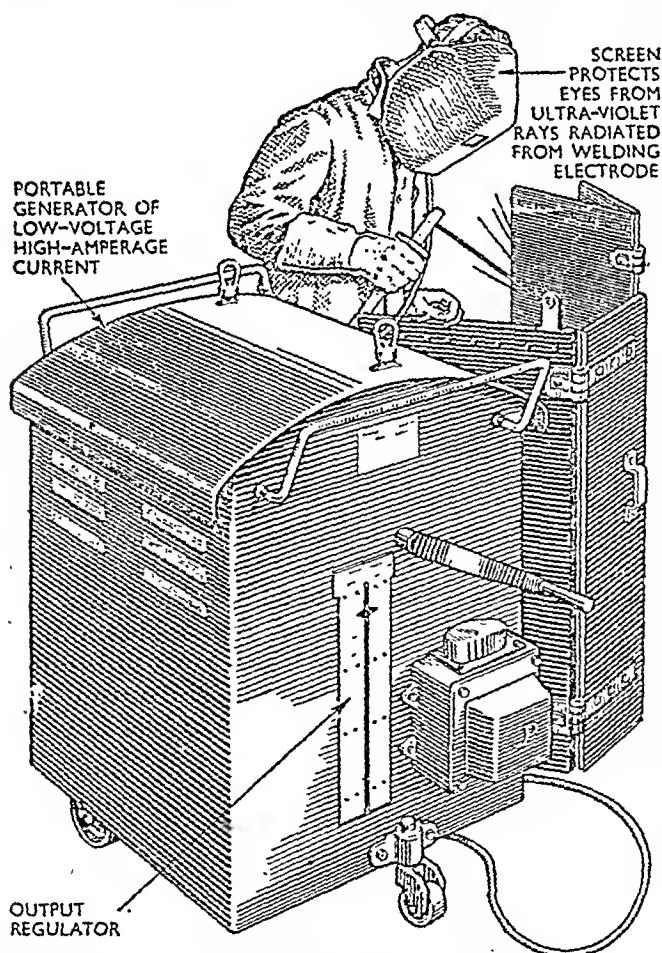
Modern electric welding apparatus which is transportable and can be operated by female labour.
